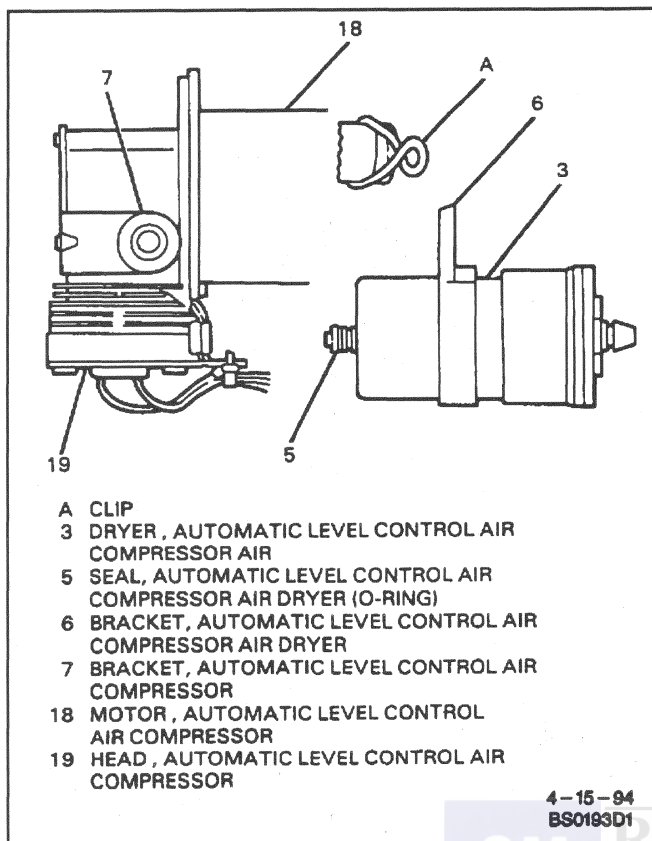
Replacing Automatic Level Control Air Compressor Air Dryer
